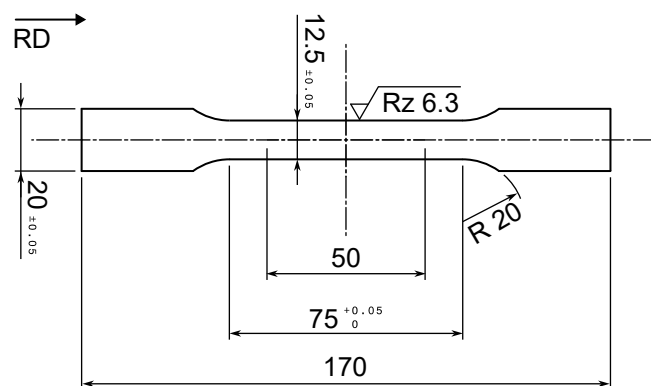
Technical drawing of the used specimen geometry. Lengths are given in millimeters.
